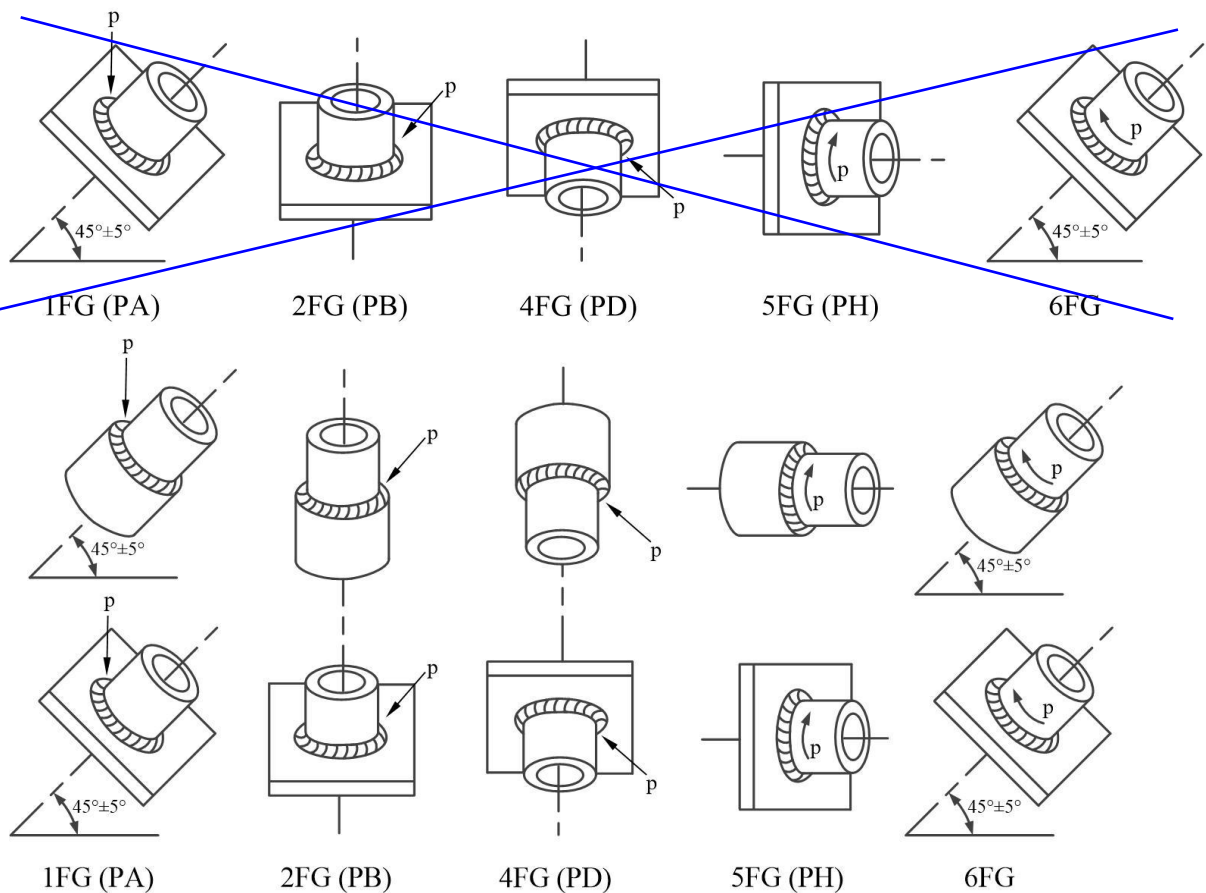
Welding Positions (Partial)
